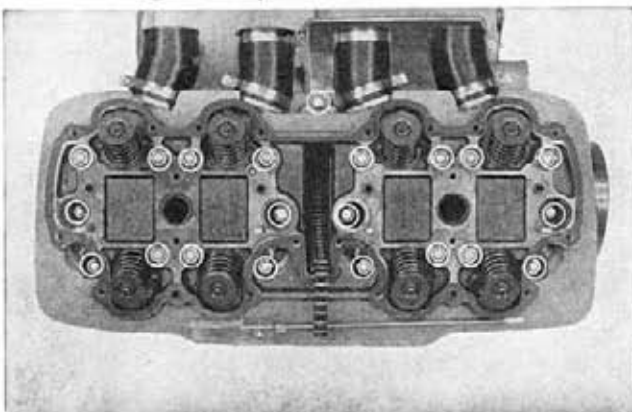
Removing cylinder head mounting nuts and bolts
